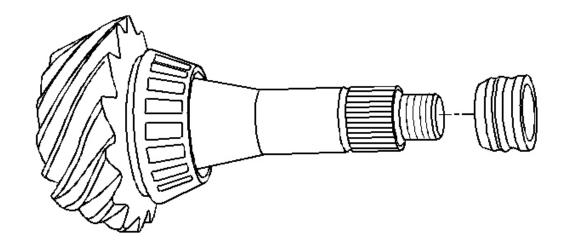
View Of Special Tool J 22536 On Pinion Courtesy of GENERAL MOTORS CORP.
